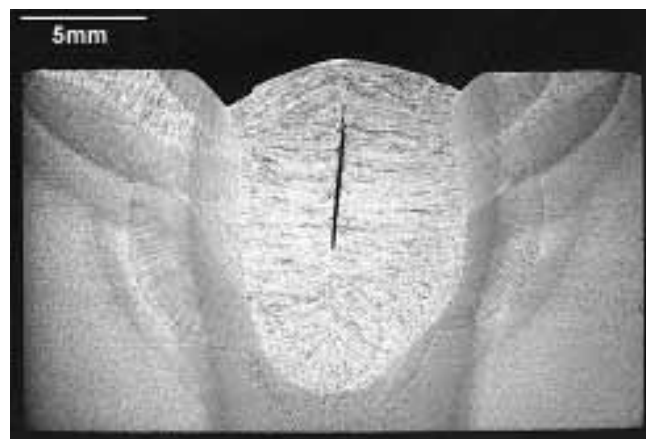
Optical micrograph of solidification cracking occurring within a weld bead [79]. This cracking can occur along the entire length of the weld bead if the conditions are right, making it potentially an extremely destructive mechanism.
